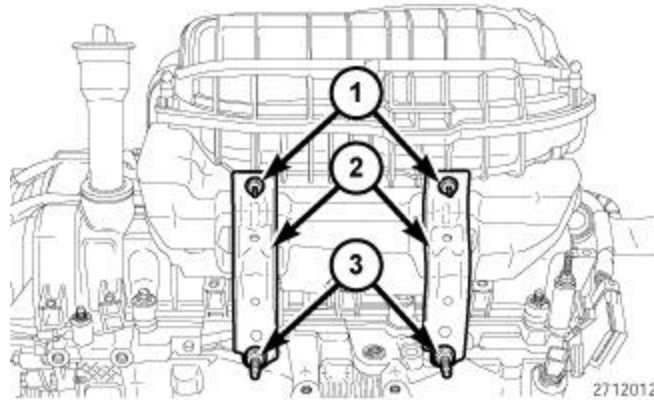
Nuts, Stud Retainers & Upper Intake Manifold Support Brackets
